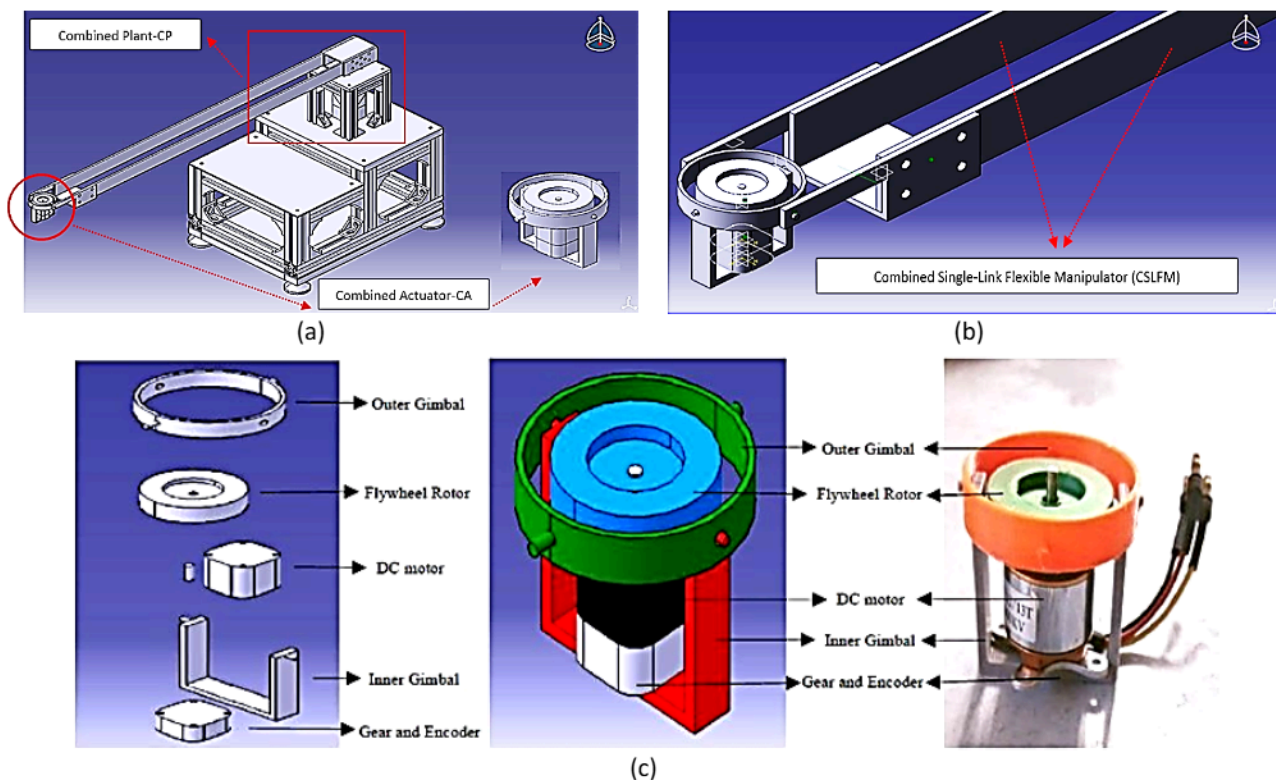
The front, top, right side, and isometric view of the MTRS (a) MTRS and CA (b) CA and CSLRFM in MTRS (c) Design of the CA
